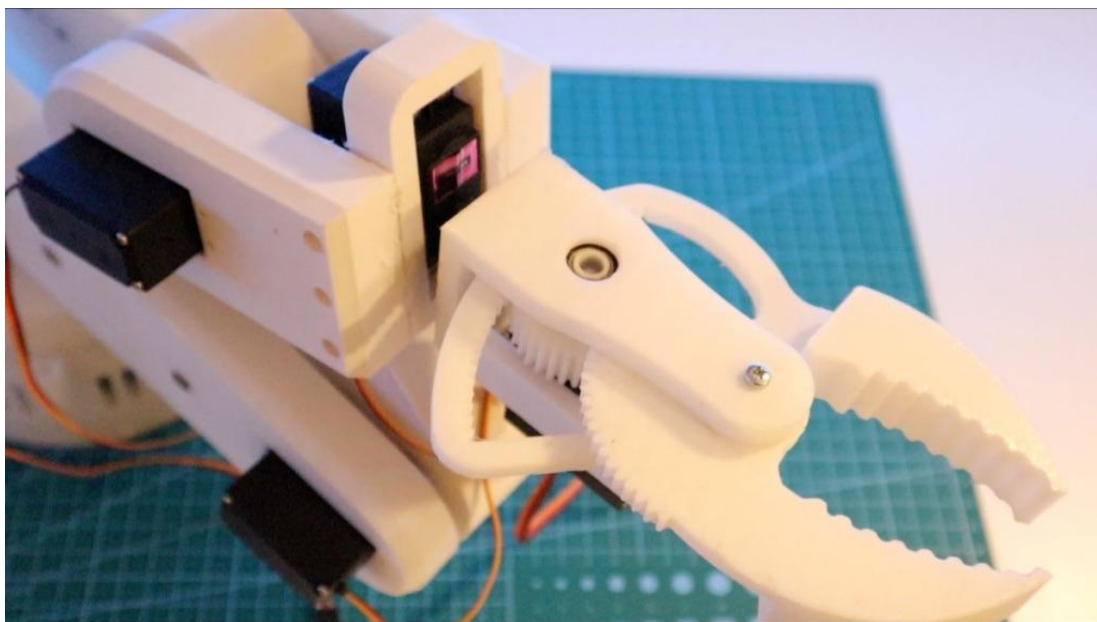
Constructed prototype showing the 3D-printed gripper, gearing, bearings and servo installation.
